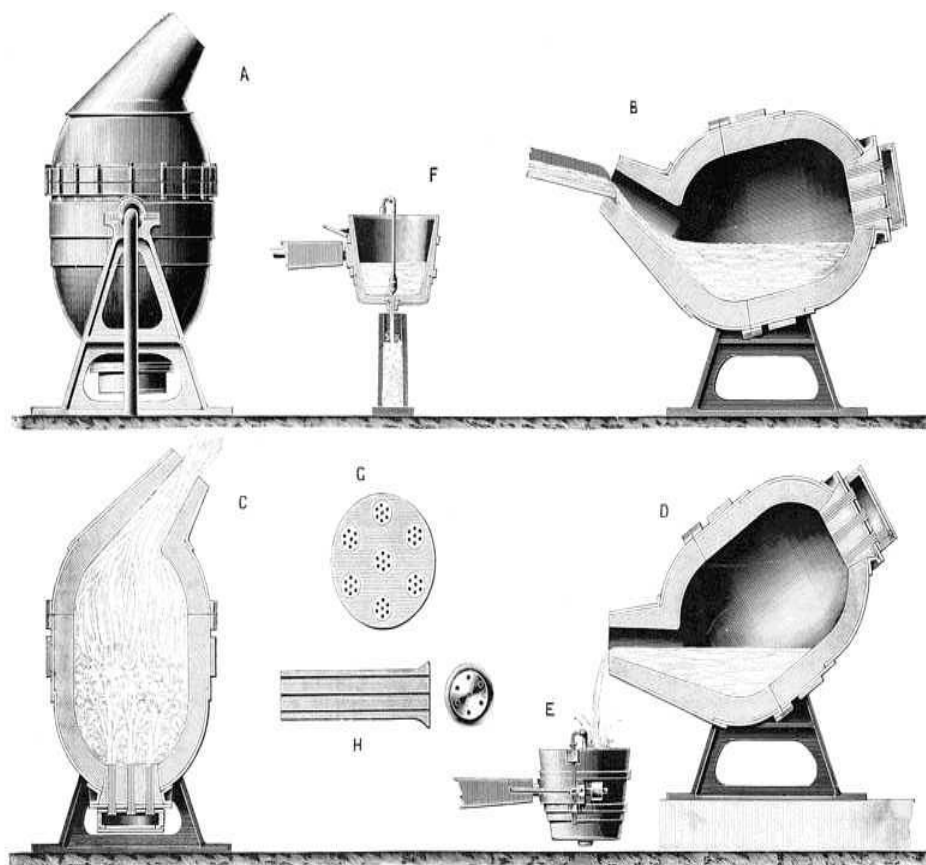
THE FIRST FORM OF BESSEMER MOVEABLE CONVERTER AND LADLE
